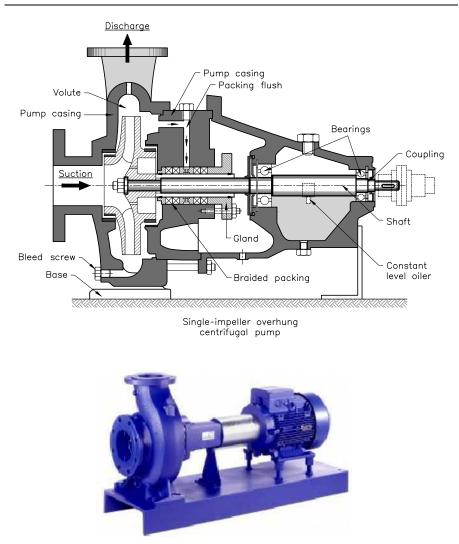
Major components of a horizontal, single-stage, end suction, top-discharge ANSI class centrifugal pump with an overhung impeller.
